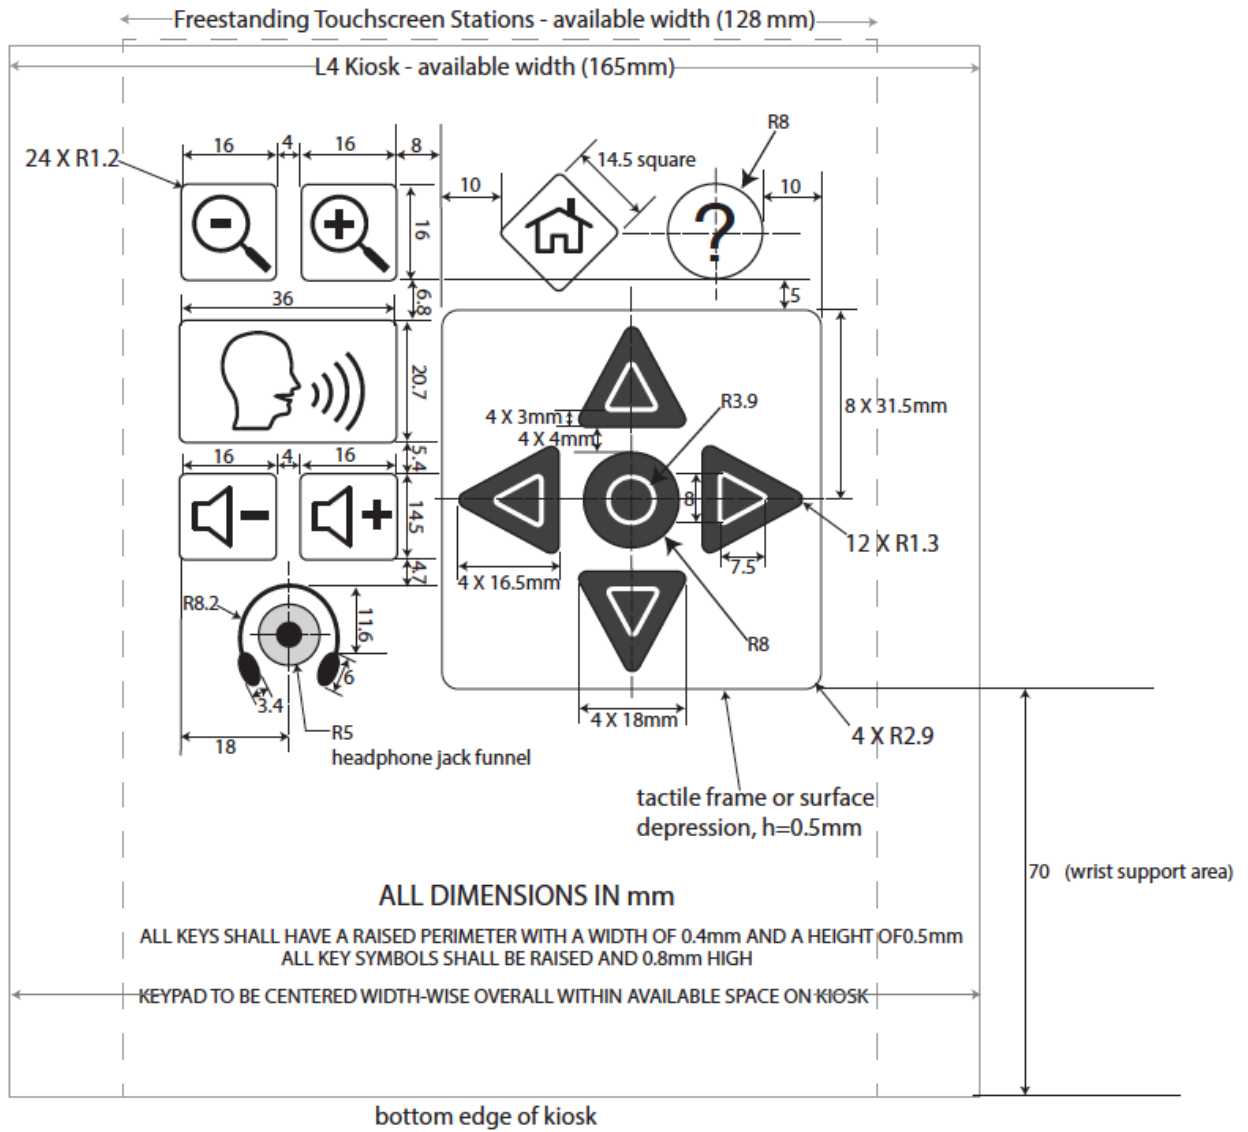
Final keypad dimensions and layout on the kiosk (keypad without a back key).
